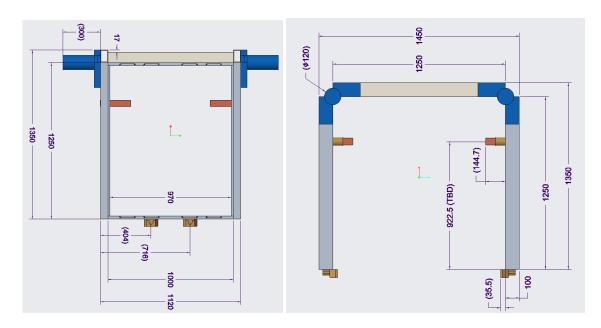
Antenna Panel Deployment Mechanism Assembly
